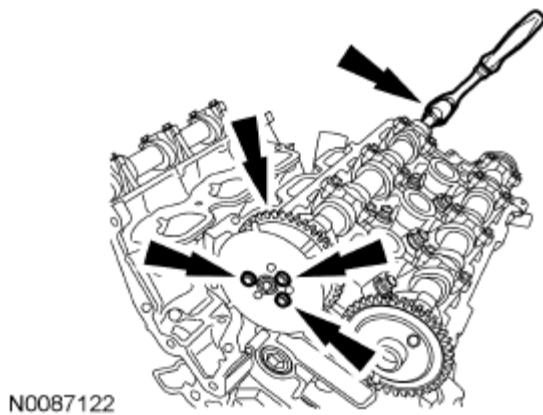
Removing LH Camshaft Phaser & Sprocket Bolts
